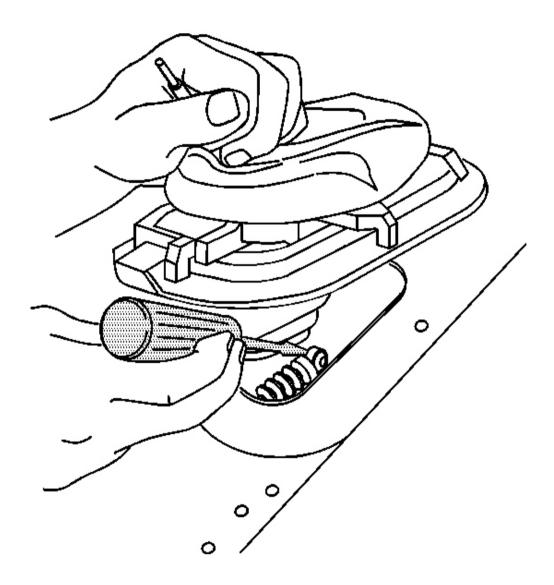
Removing Nuts Retaining Shift Control & Driveline Tunnel Courtesy of GENERAL MOTORS CORP.
